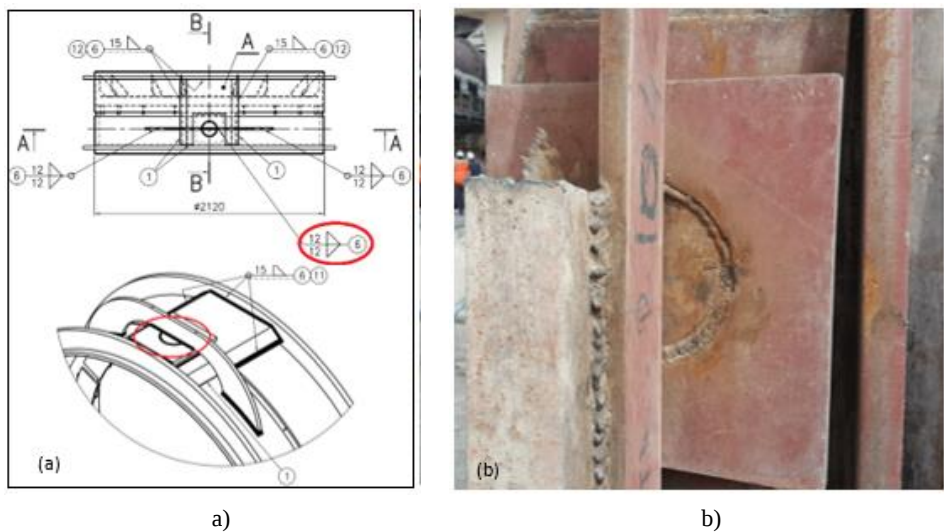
Missing weld on the lock plate of the pinning zone (a, b)
